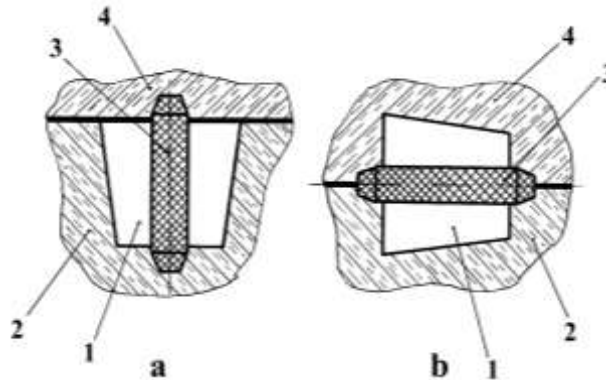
Possible location of the casting in the mould: vertical (a) and horizontal (b) positions; 1 – mould cavity (casting); 2 – lower half-mould; 3 – core; 4 – upper half-mould
